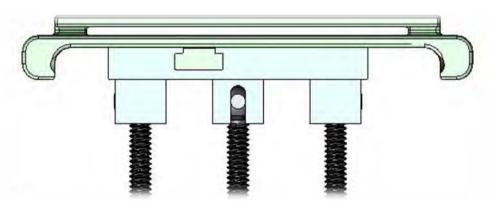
Modified design of the mating between the screw shafts and the top plate.
